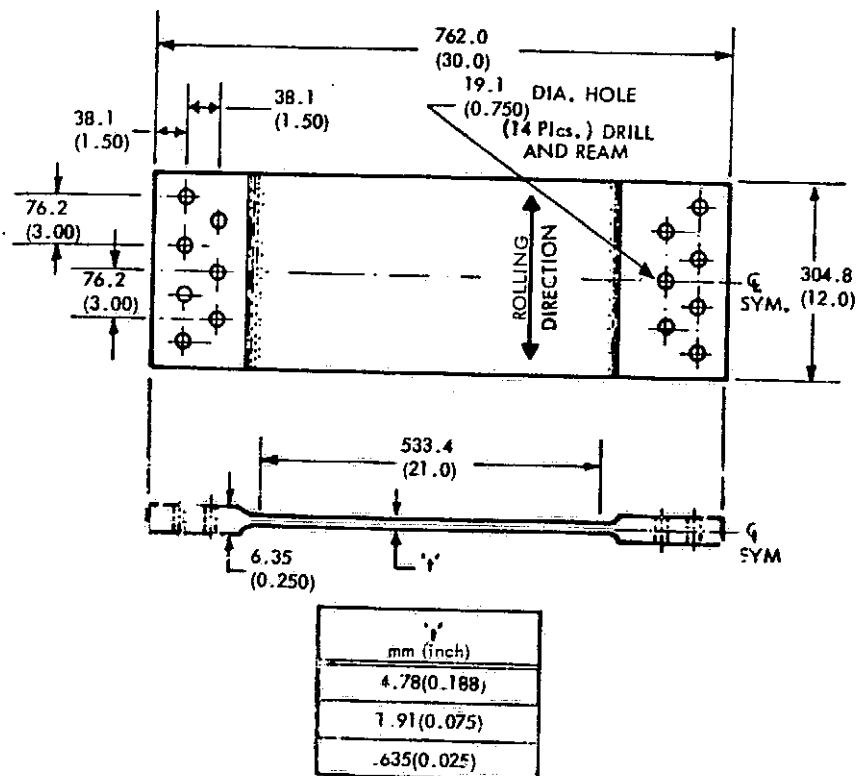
2219-T87 ALUMINUM CENTER CRACK SPECIMEN
